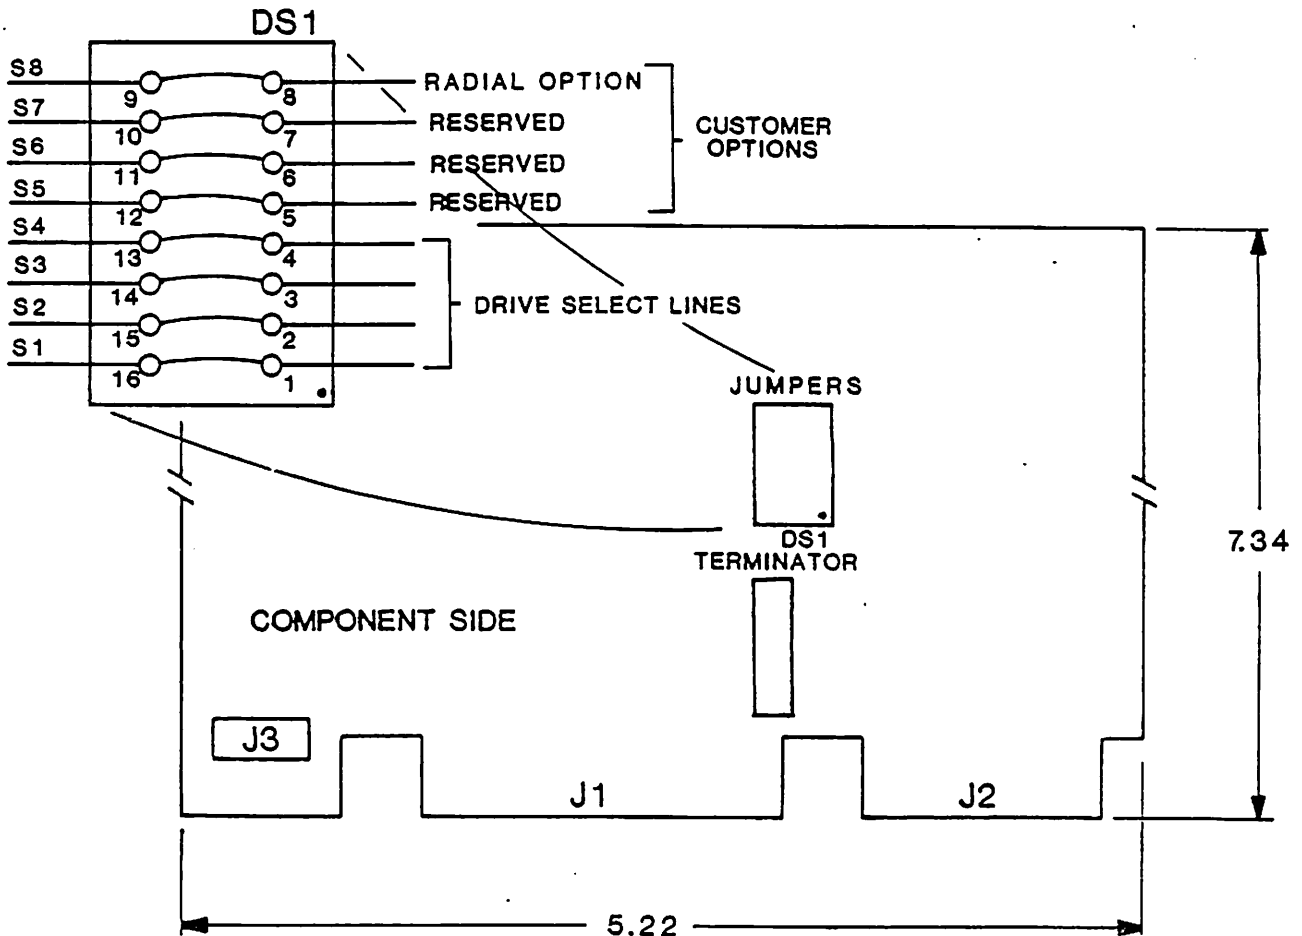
Read/Write Circuit Board Terminator, Switches, and Connector
